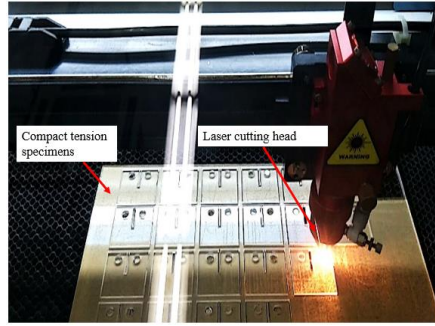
Preparation of compact tension specimens using laser cutter machine.
